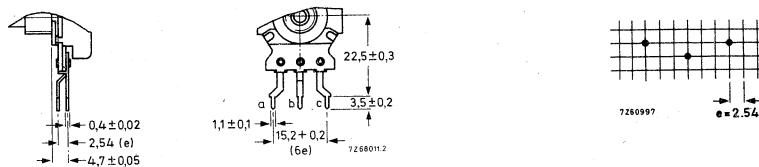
Long printed-wiring pins, pin distance 15,2 mm (6e), single potentiometer.
